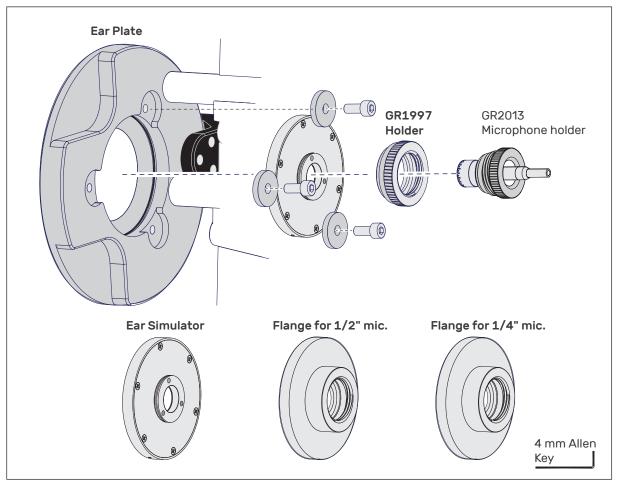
Detailed view of the fittings for ear simulator mounting. The mounting of the 1/2" and 1/4" Microphone Flanges is similar, except that the GR1997 Holder in the middle is an integral part of the two flanges.
